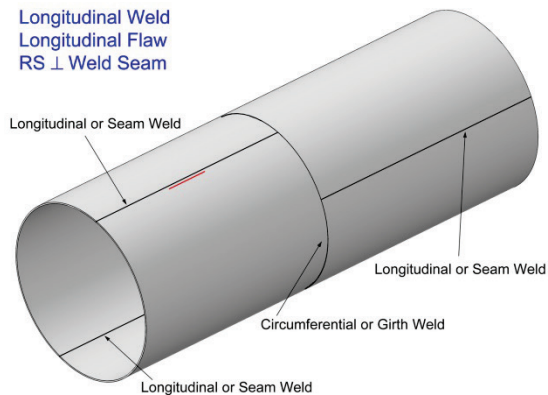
CASE 1: AXIAL CRACK PARALLEL TO AN AXIAL WELD - RESIDUAL STRESS PERPENDICULAR TO THE AXIAL WELD WITH A DOUBLE-V NOTCH
